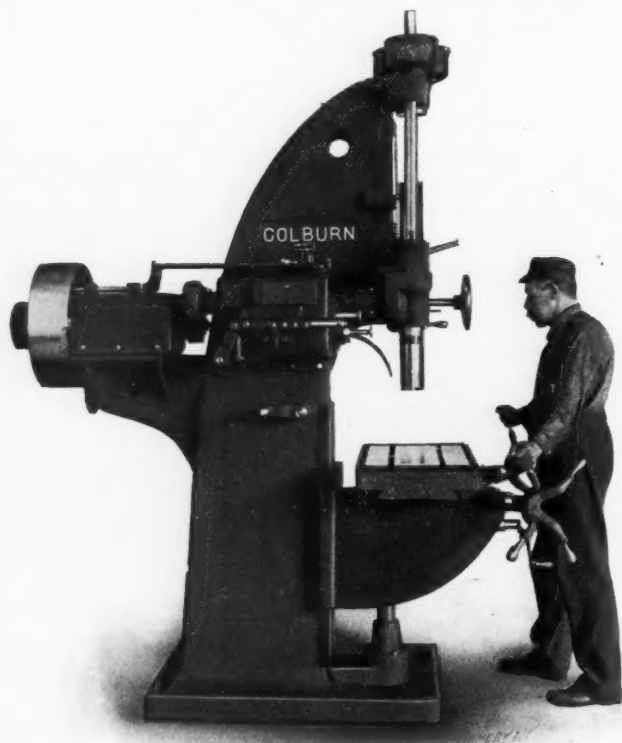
Colburn Heavy-duty Drill Press with Compound Table
